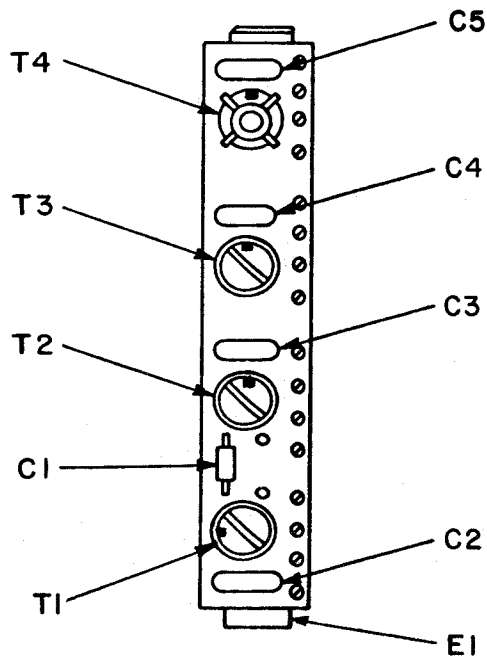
13 MHz Subassembly A2A4A3, Component Locations
